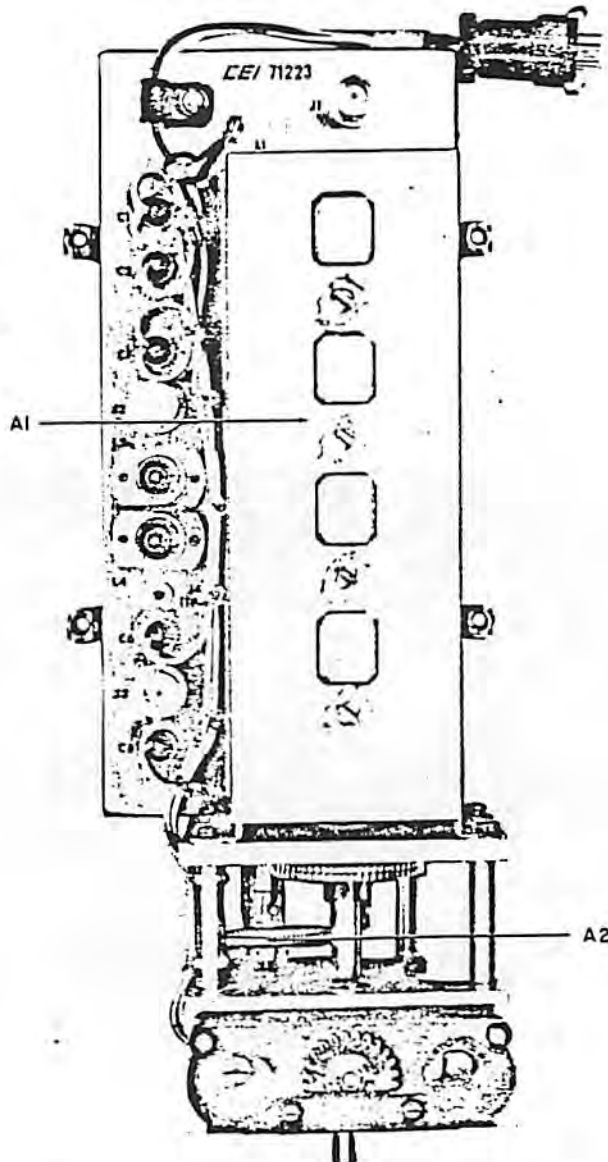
Type 71227 10-30-MHz Tuning Assembly, Component Locations
